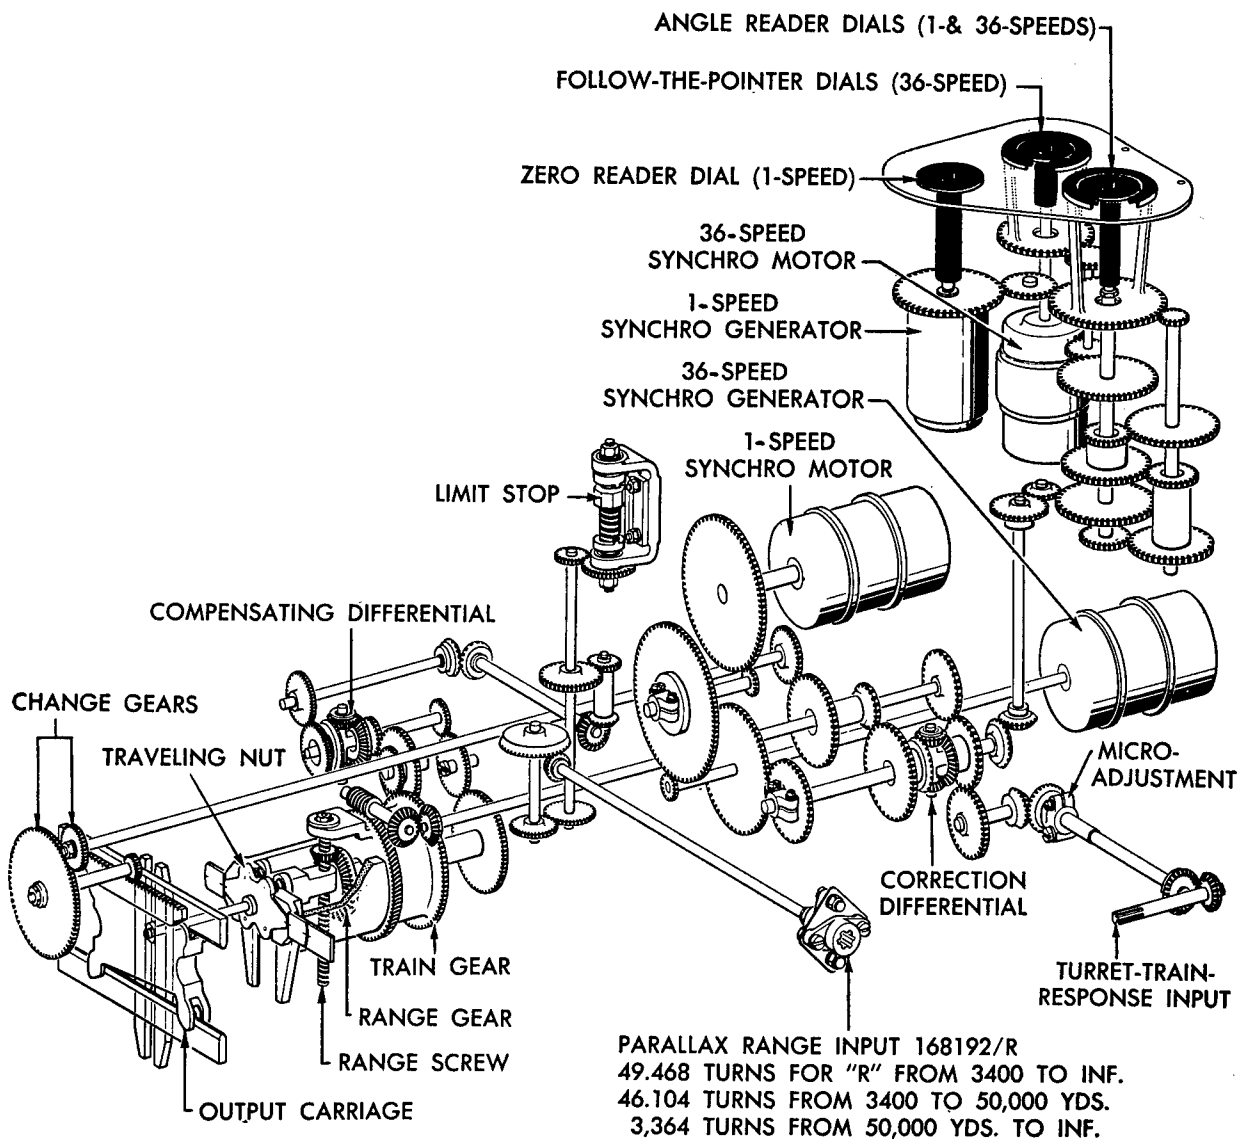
An isometric schematic, identifying the parts enclosed in the case, completes the assembled arrangement illustrations.
